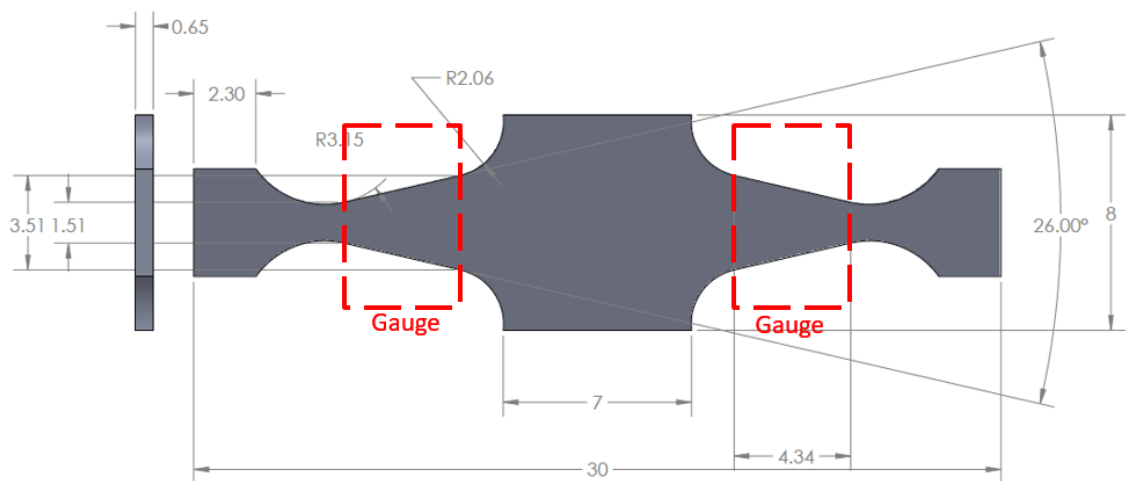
Drawing of the dual gauge section Krouse type mini specimen, all units are in mm.
